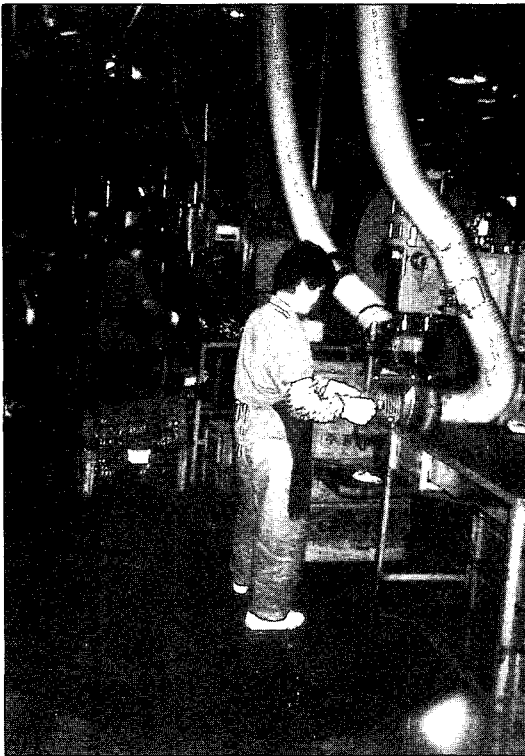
Typical position and posture of foot-switch stepping for spot welding. Right knee is slightly flexed and rotated externally
